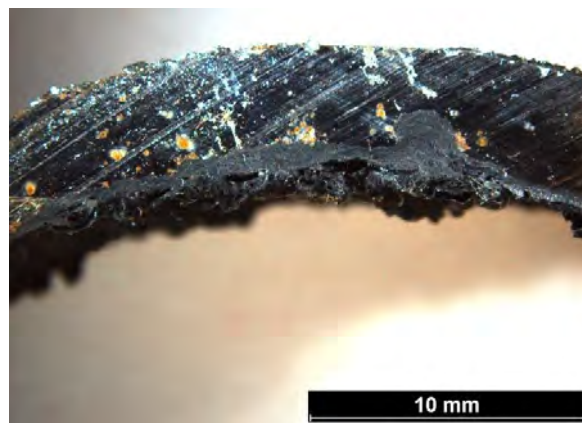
Pitting corrosion, stereo microscopy
